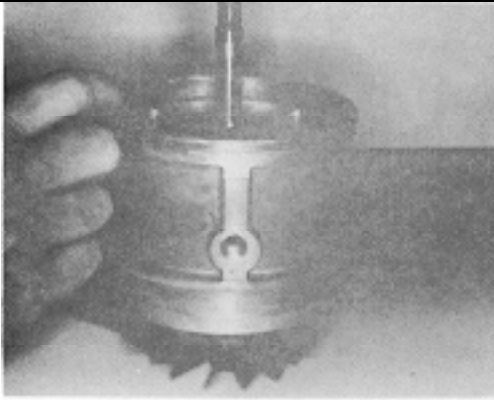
, T-536. Installing "O" ring on bearing housing
